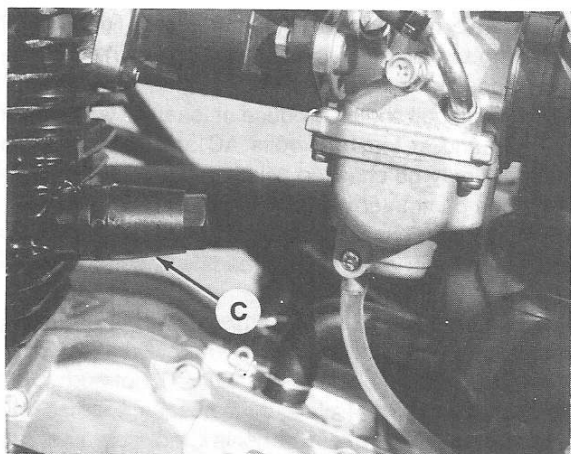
Remove cap (C) for access to camshaft chain adjuster (J—Fig. Y6-12).
